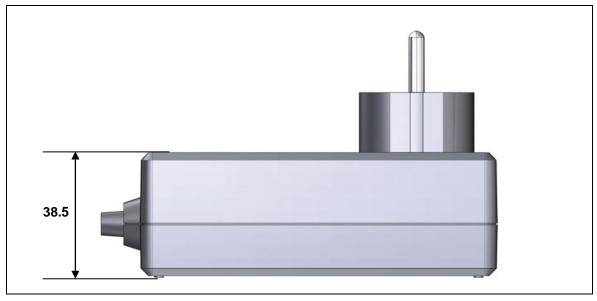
Dimensions of the PD14/PD15 Power Supply, in mm, side view
